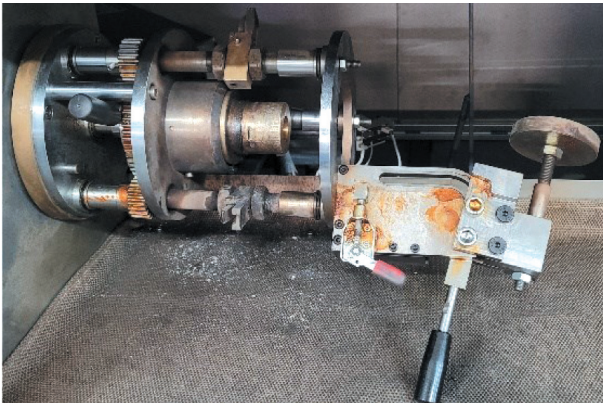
Tool mounted in the working space of the AS-03 Welding Station
